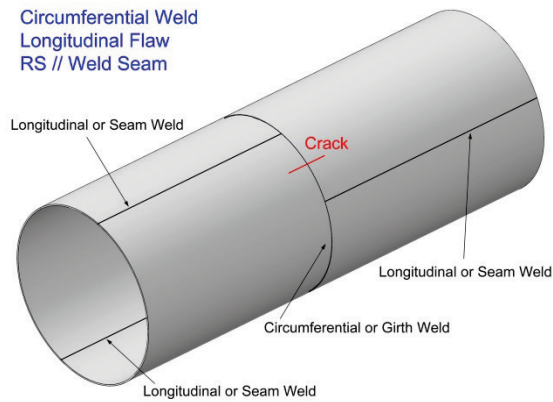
Case 2: Axial Crack Perpendicular to a Circumferential Weld - Residual Stress Parallel to the Circumferential Weld with a Double-V Notch
